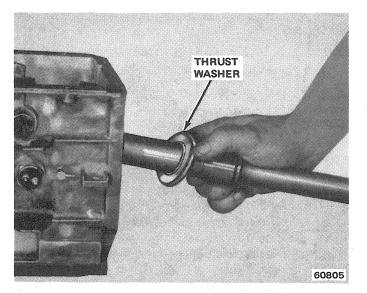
B-13 First Gear Thrust Washer Removal/Installation
